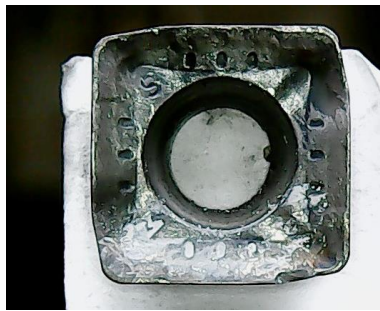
Super Duplex – Tools – LN2 – Drilling.
